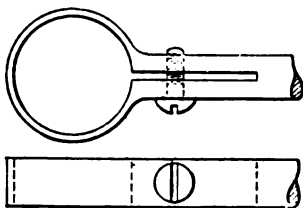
Handle for Inside Micrometer, Figs. 34 and 35
